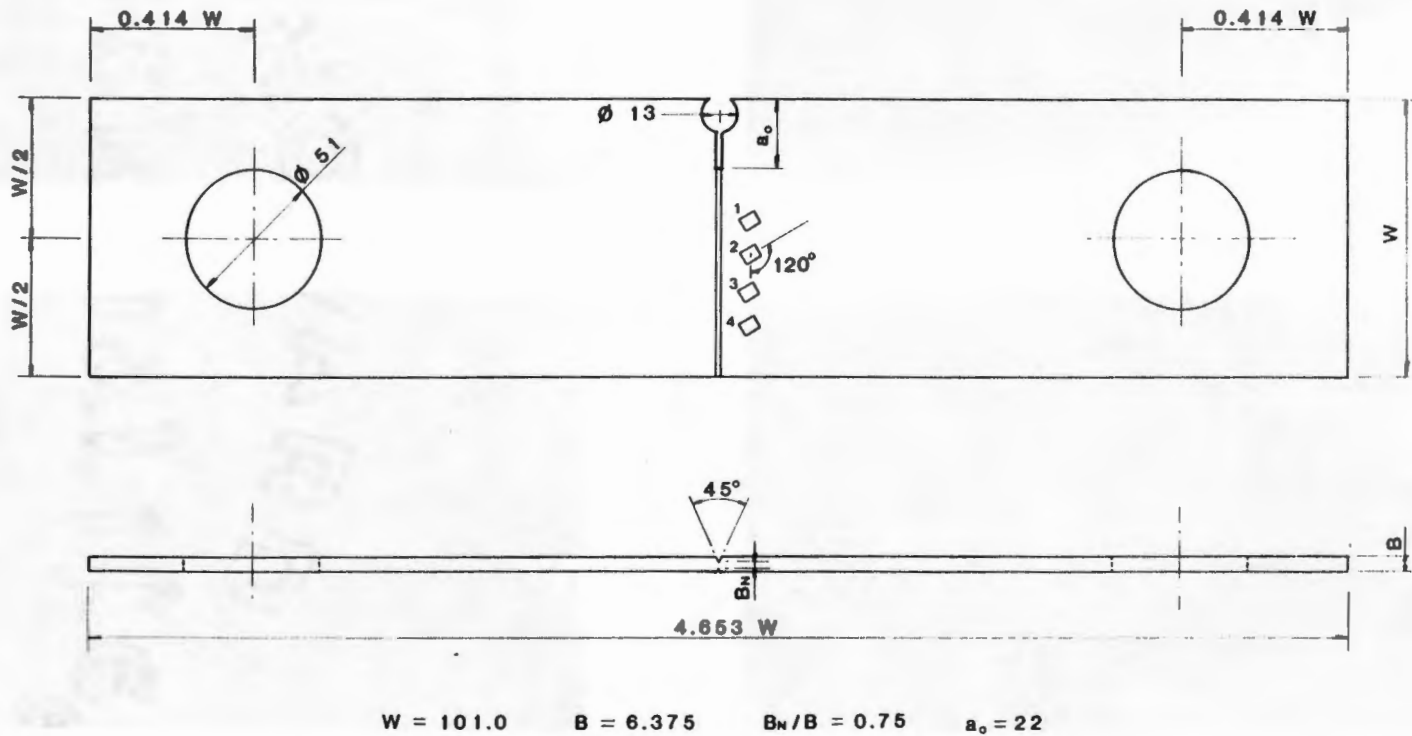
Geometry of the 7075-T6 aluminum single edge notch specimen.
